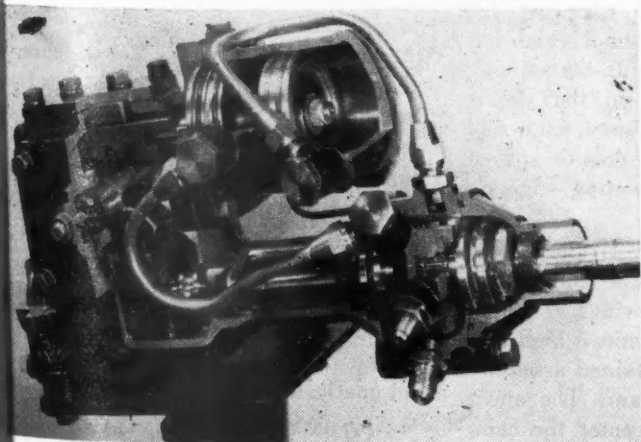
Garrison gear installed, showing drag link valves and connecting lines
